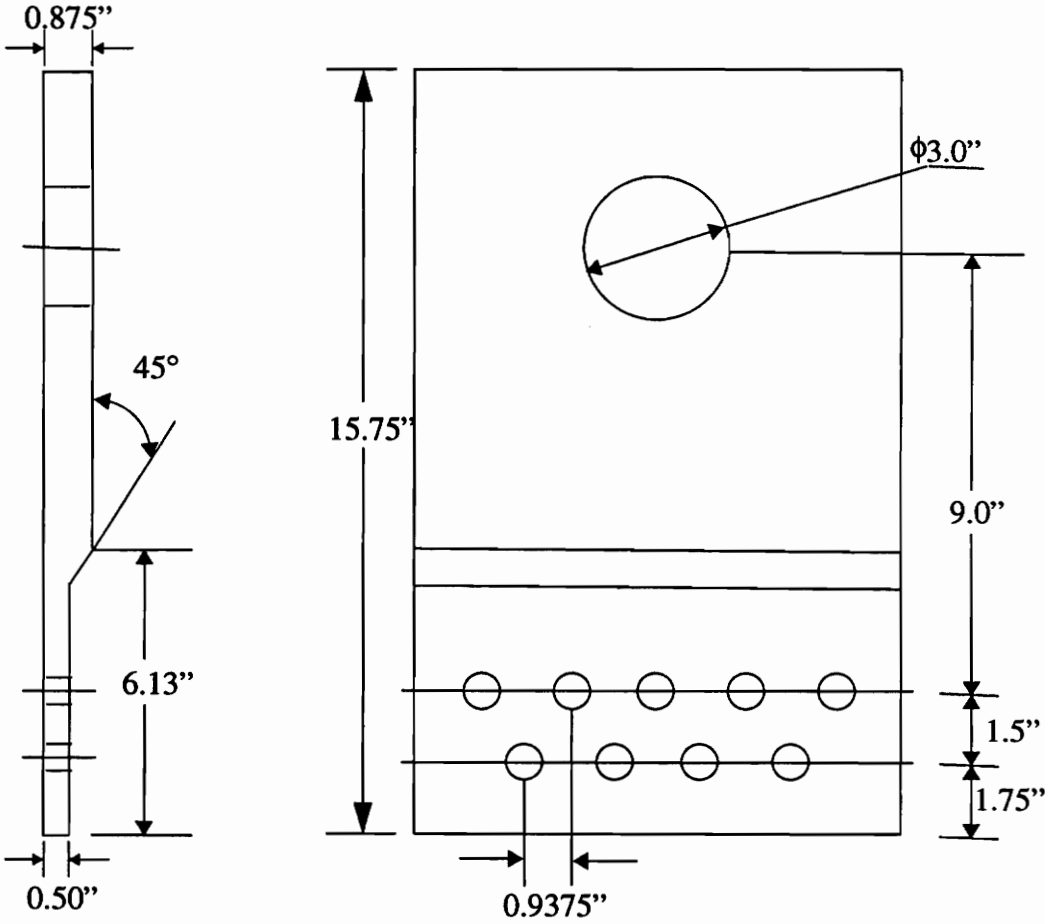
Dimensional details of the steel laps for 3- and 7-hole inboard specimens
